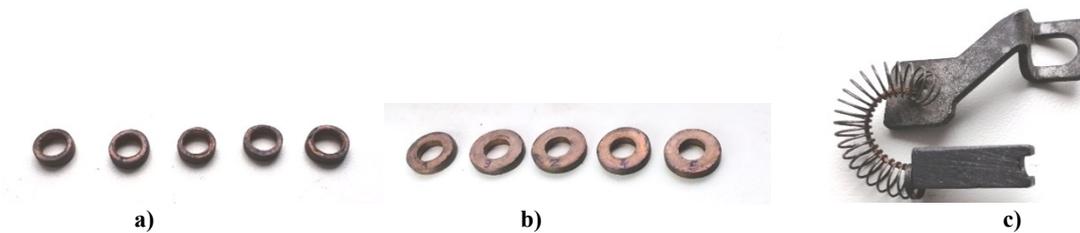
Samples for wear testing: a) uncoated (deeply worn) copper samples; b) coated copper samples; c) real alternator graphite brush (counterbody) with the worn place shown.
